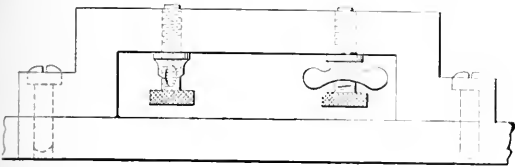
Fixture for Holding the Piece shown in Fig. 27.
